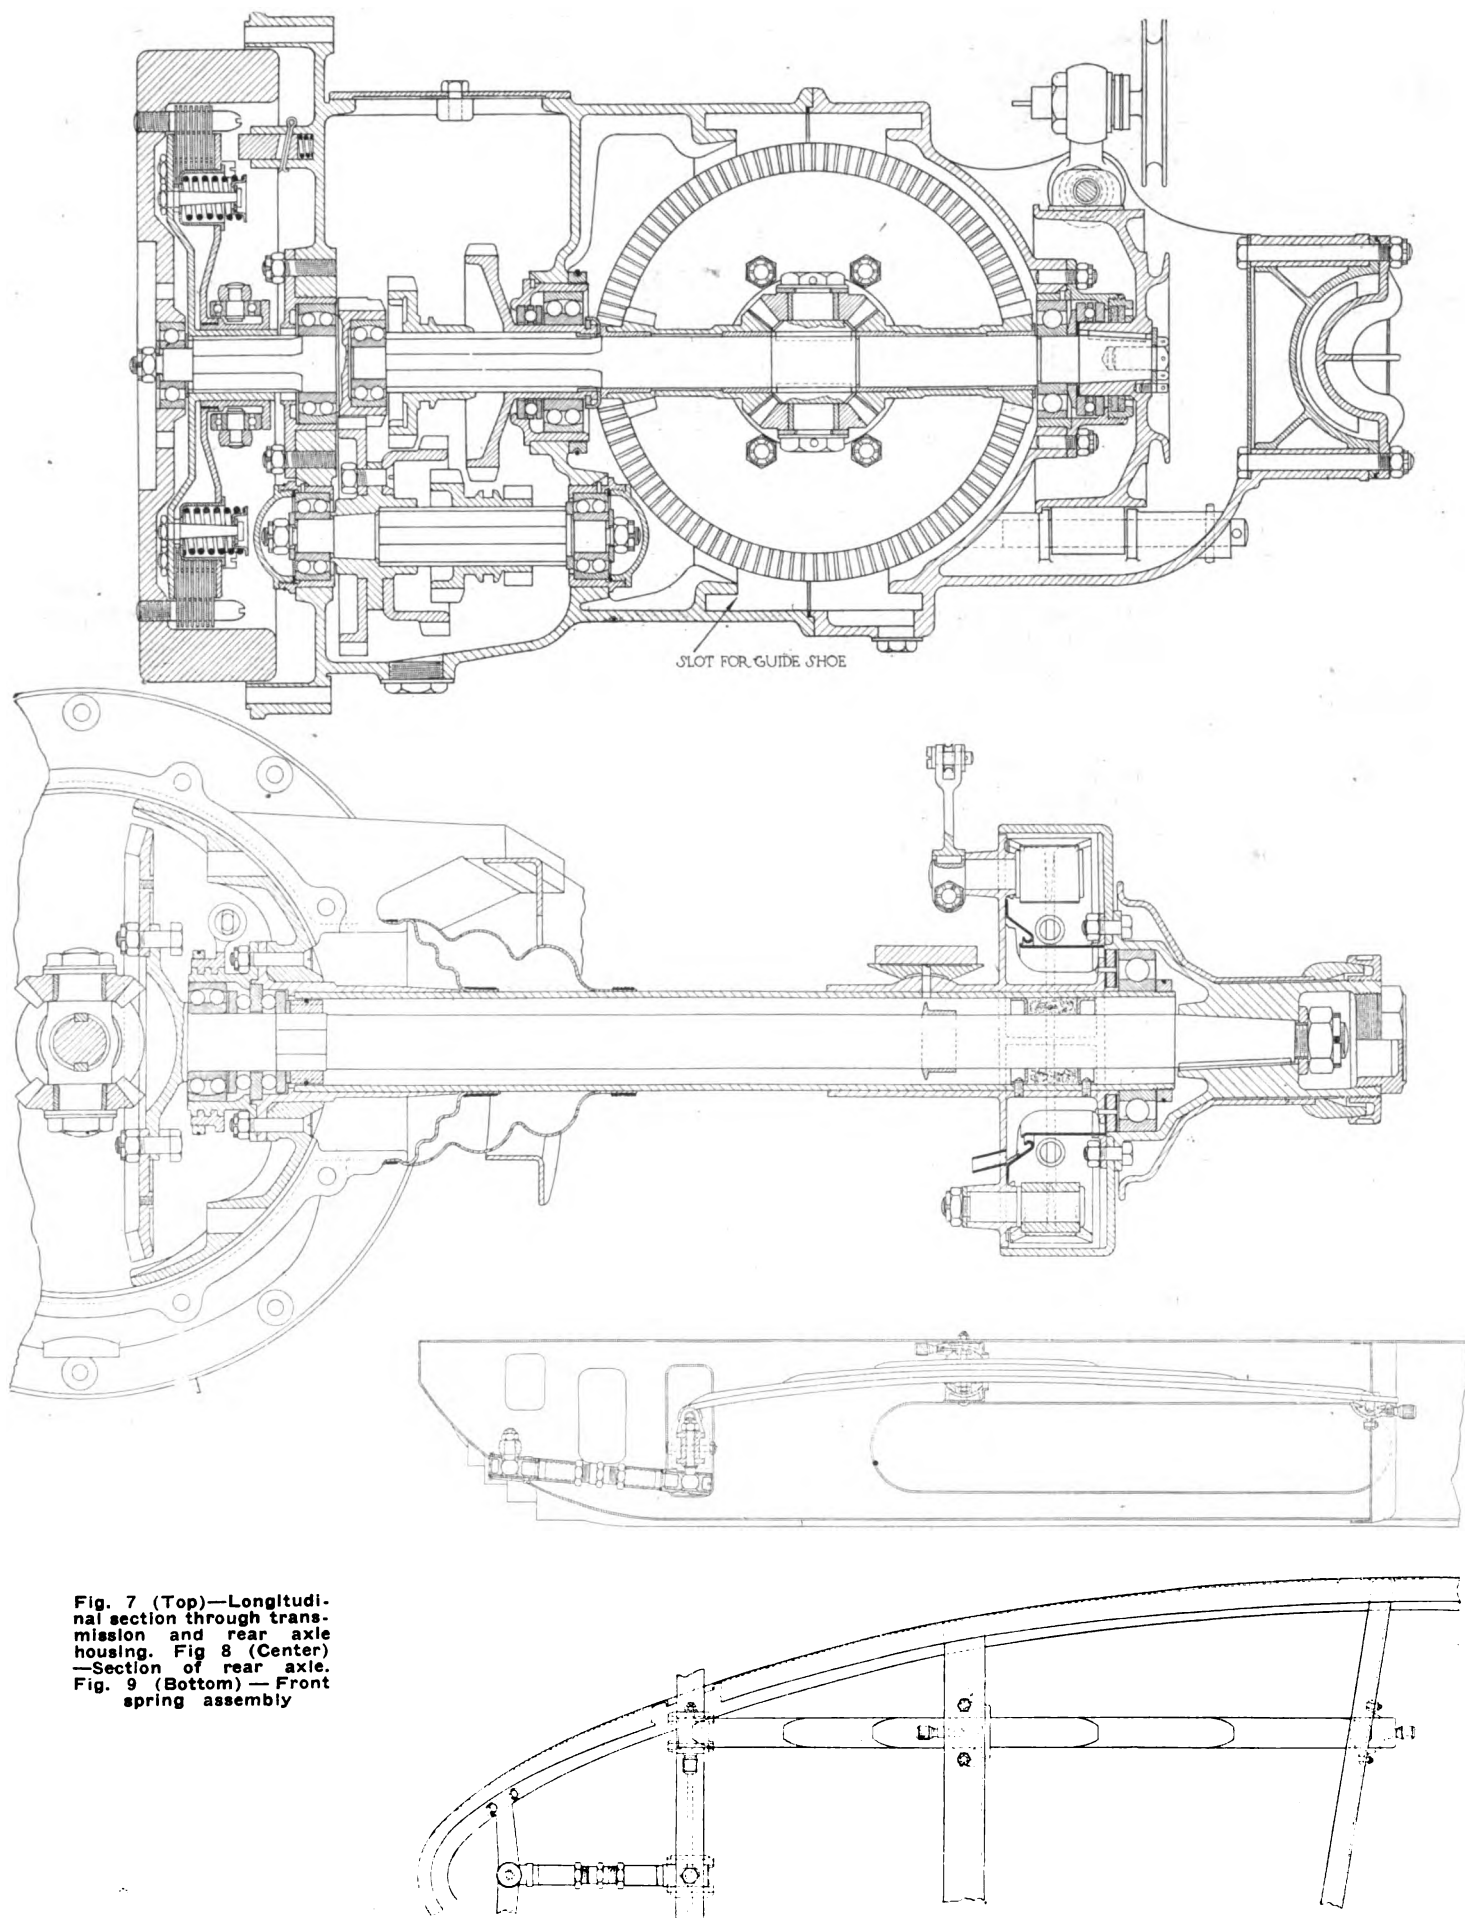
(Top)—Longitudinal section through transmission and rear axle housing. Fig. 8 (Center)—Section of rear axle. Fig. 9 (Bottom)—Front spring assembly
